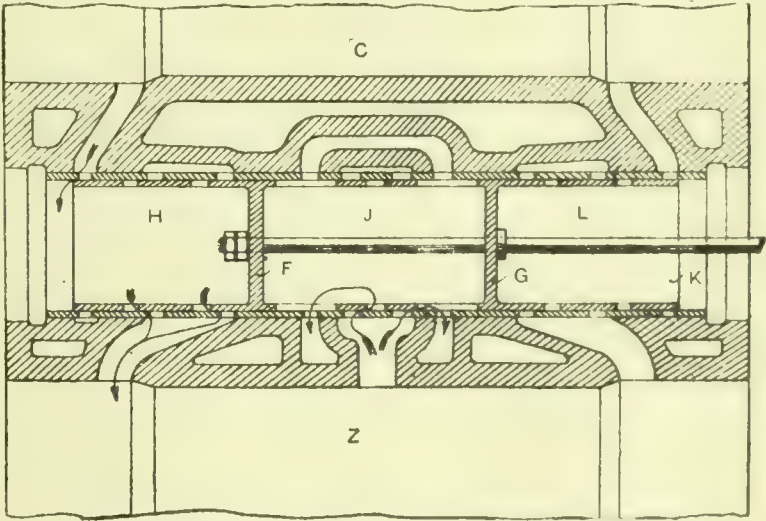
VALVE FOR MULTI-CYLINDER STEAM ENGINES.
